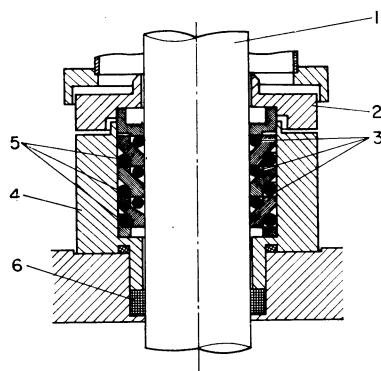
Rotary seal with rubber O-rings and Teflon O-rings: (1) actuating shaft; (2) seal nut; (3) Teflon O-rings; (4) seal housing; (5) rubber O-rings; (6) Teflon shaft guide bushing. After Smith¹¹⁵¹ (*Courtesy of Pergamon Press*)
